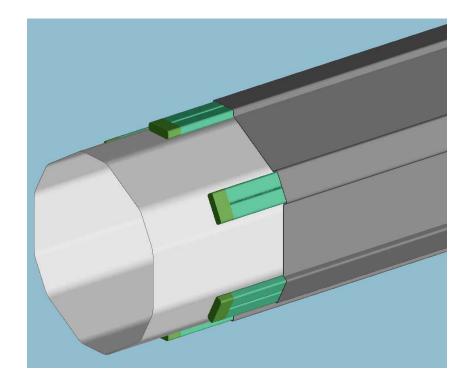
Exploded view showing the cooling tubes in the castellation and the turnaround.
